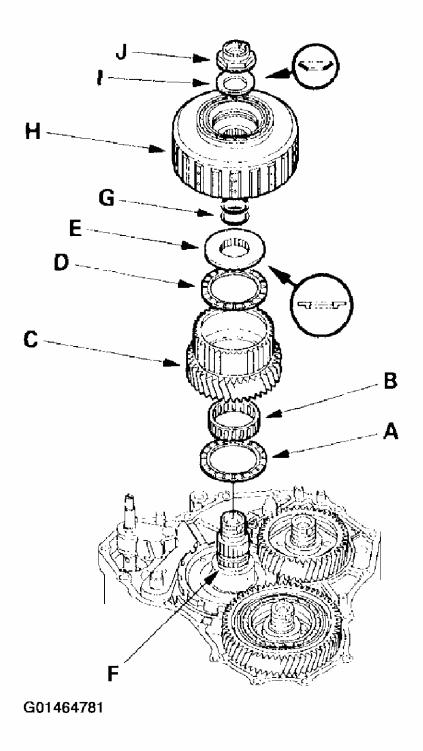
Installing The Thrust Needle Bearing, Needle Bearing, 3rd Gear, Thrust Needle Bearing & 31 X 63.5 mm Splined Washer On The Countershaft Courtesy of AMERICAN HONDA MOTOR CO., INC.
